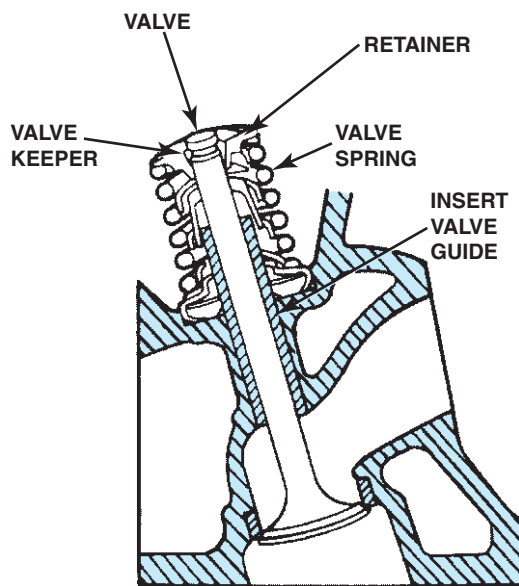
Insert valve guides are removable tubes driven into the head. Integral valve guides are part of the head casting.
